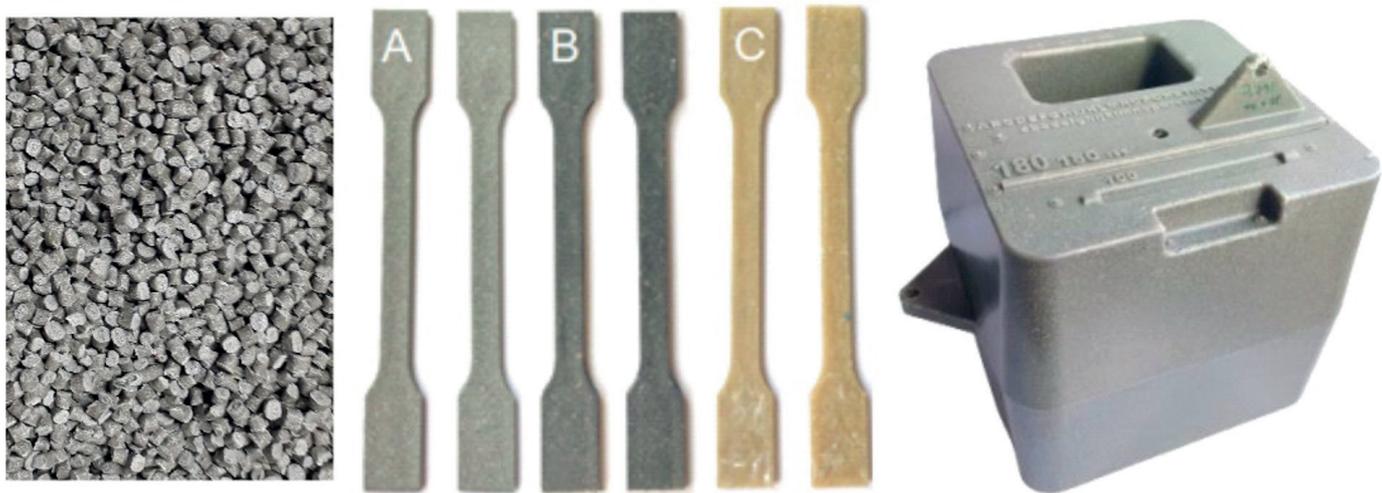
Extruded granulates, injection-moulded tensile test specimen and rotational moulded sample
